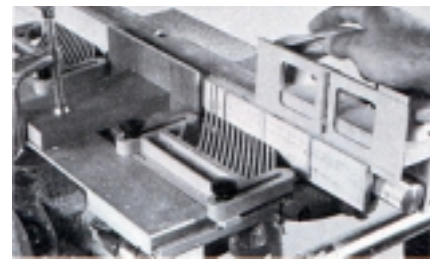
The table saw is used to remove bandsaw marks from the strips. Note positions of the Feather Boards and Fence Straddler.
